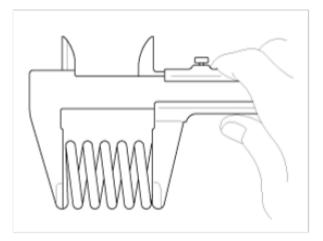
Measuring Valve Spring Free Length Using Vernier Calipers Courtesy of HYUNDAI MOTOR AMERICA
